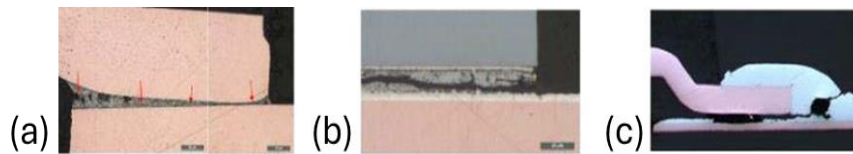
Typical fracture failure in packaging under thermal fatigue loading (a) Clip solder crack (b) Die attach crack (c) PCB solder crack.
